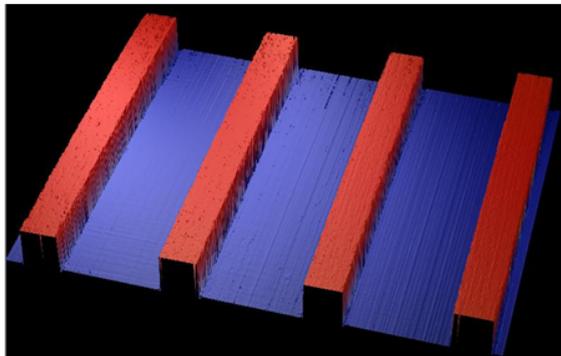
Dimensional analysis of machined part of the cylinder made Veeco™ optical profilometer.
